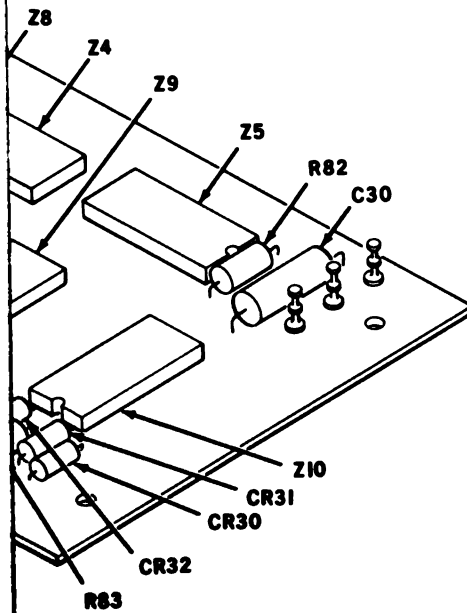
②. Control base, exploded view (sheet 2 of 3).
